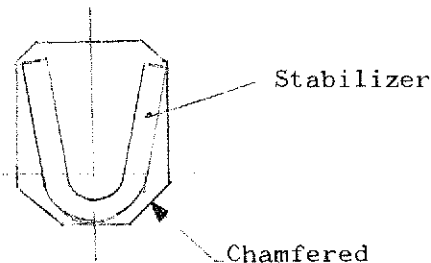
Correct seating of contact in housing cavity (viewed from contact entry side of housing)
